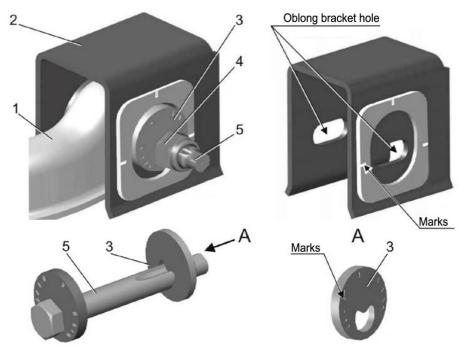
Wheel alignment device: 1 - upper suspension arm; 2 - upper subframe arm bracket; 3 - eccentric washer; 4 - nut; 5 - adjustment bolt complete with eccentric washer.
